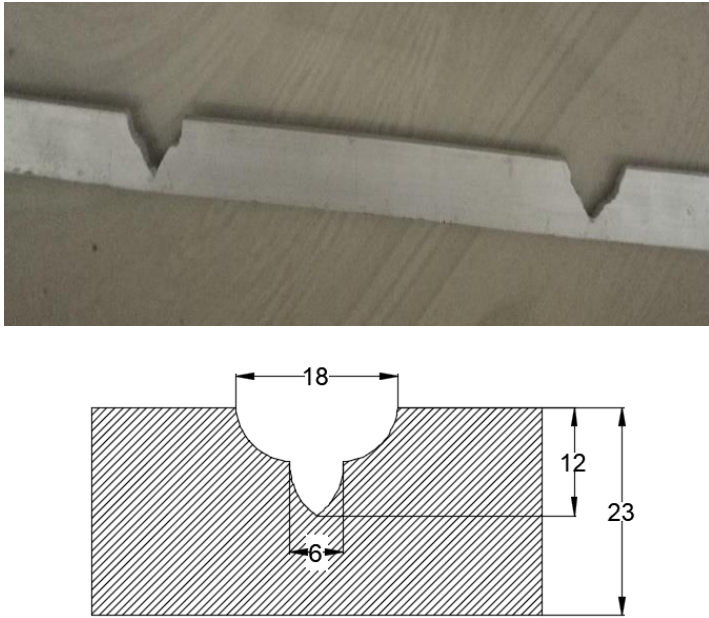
Photographic view and geometrical view of plain tape step cut arc
